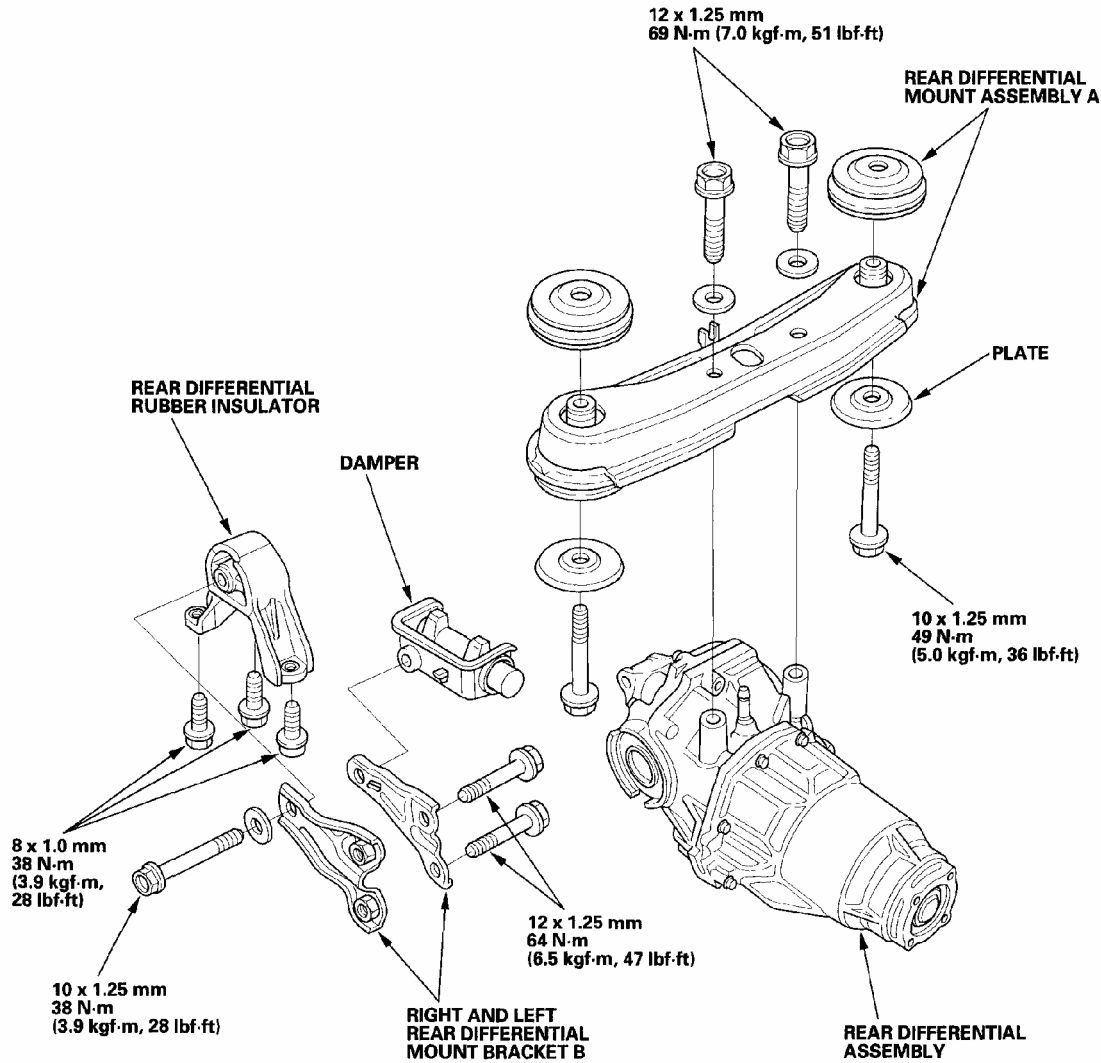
Exploded View Of Differential Mount And Torque Specifications
